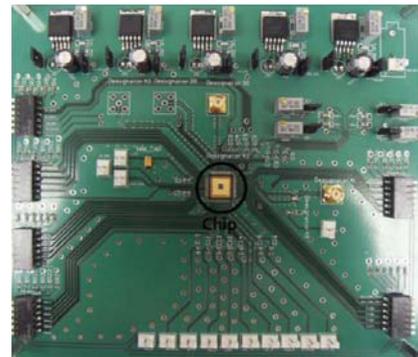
11.1GHz divide-by-3 ILFD test chip packaged and mounted on FR-4 board.
